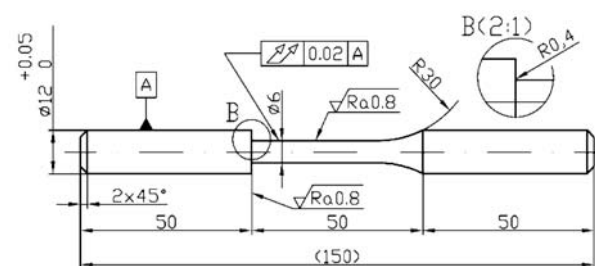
Shape and dimensions of notched specimens for fatigue tests
